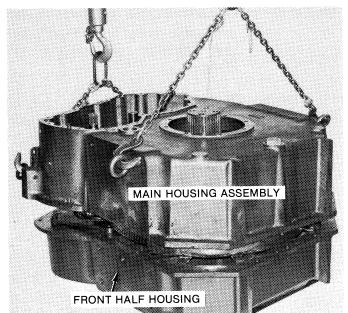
Removing or Installing Main Housing Assembly. NOTE
